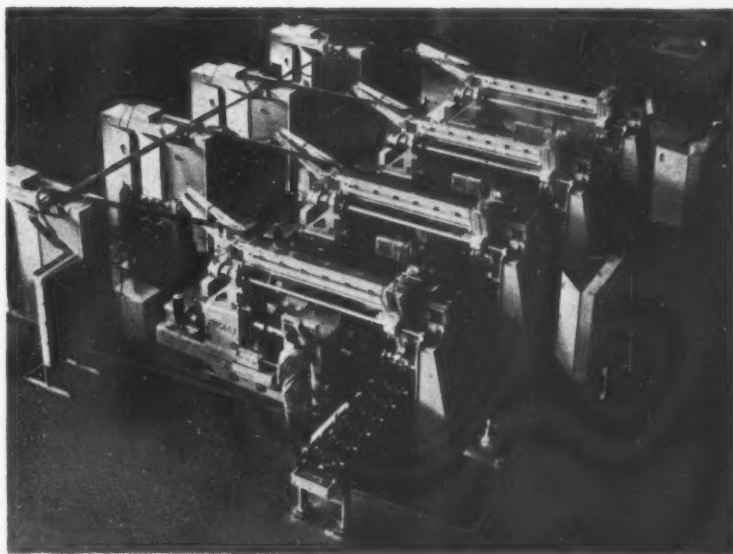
An Installation of Automatic Lathes Each of which Machines one Crankpin of a 4-throw Crankshaft
